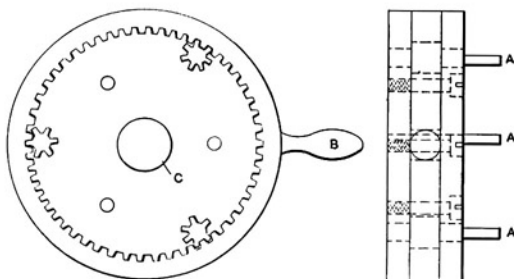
Fixture used for Locating Bearing at Centre of Wheel
